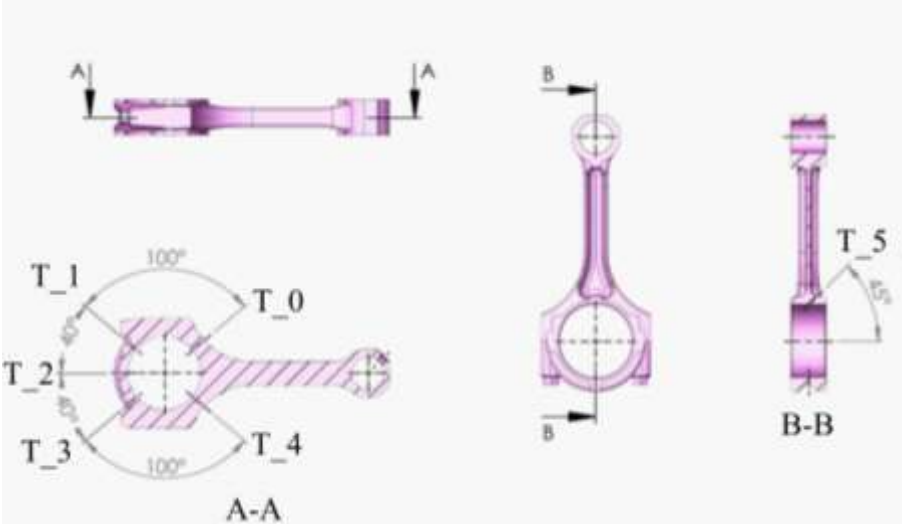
Renault RS right connecting rod mid-plane bearing thermocouples location
